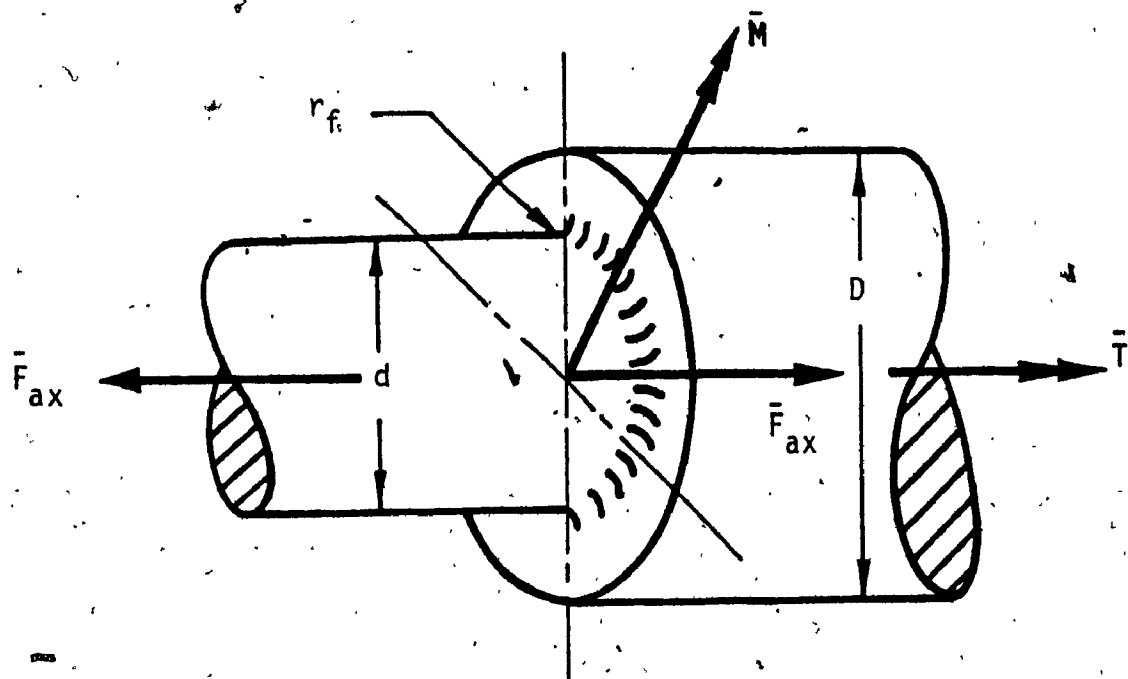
Loading at a critical shaft section having notch due to shoulder [78]
